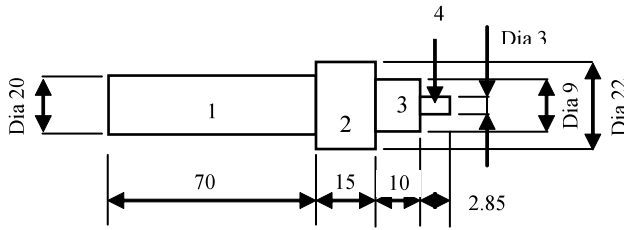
Schematic illustration of the tool used in the present study; 1. Tool shank, 2. Tool head, 3. Tool shoulder, 4. Tool pin (All Dimensions are in mm).
